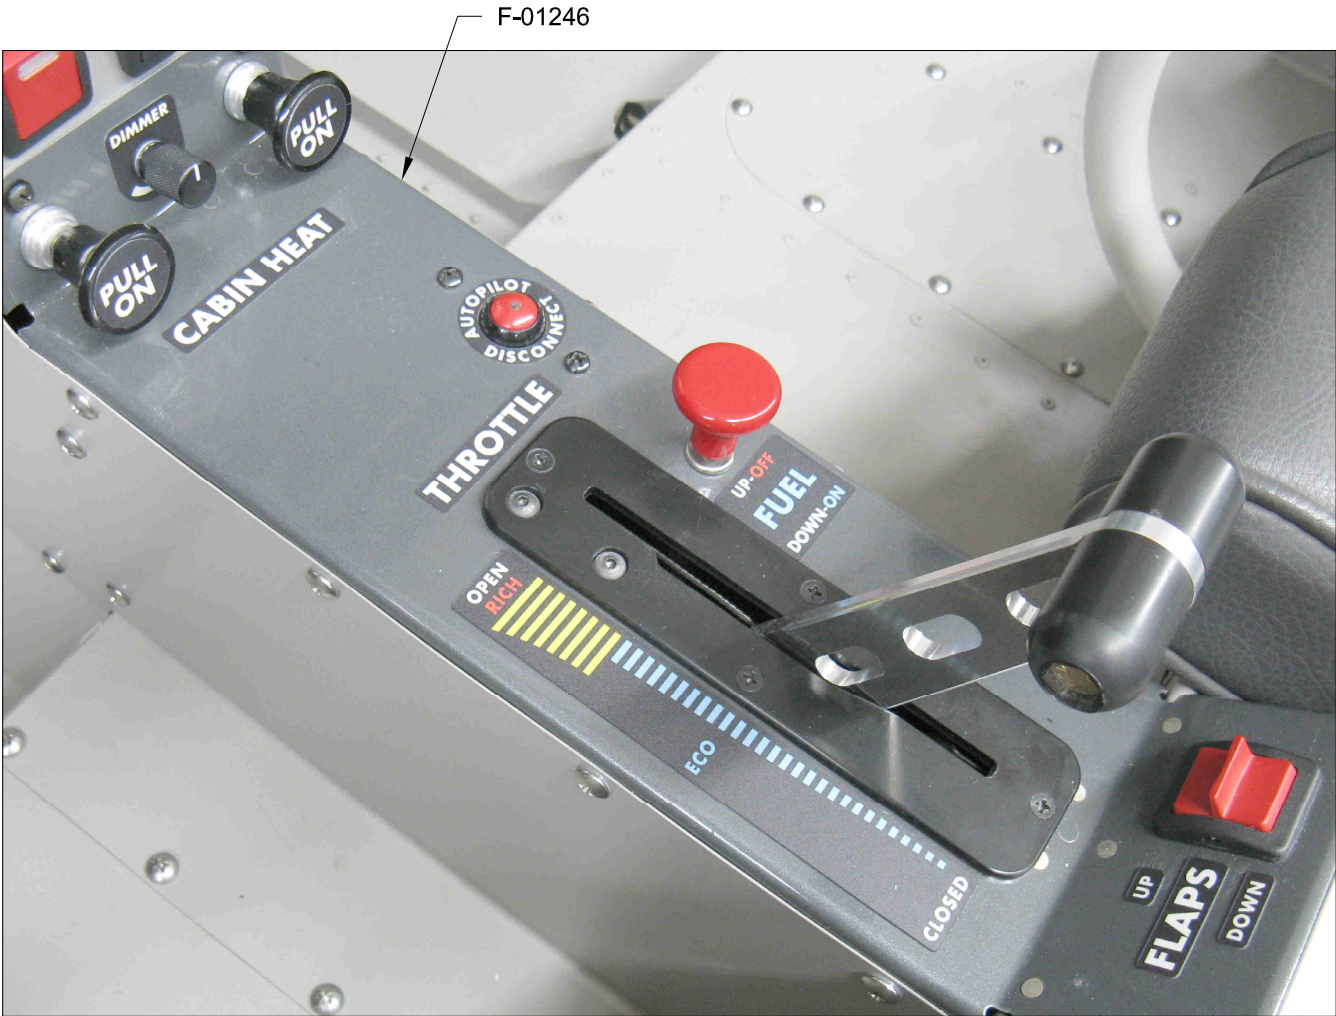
TUNNEL COVER LABEL PLACEMENT
